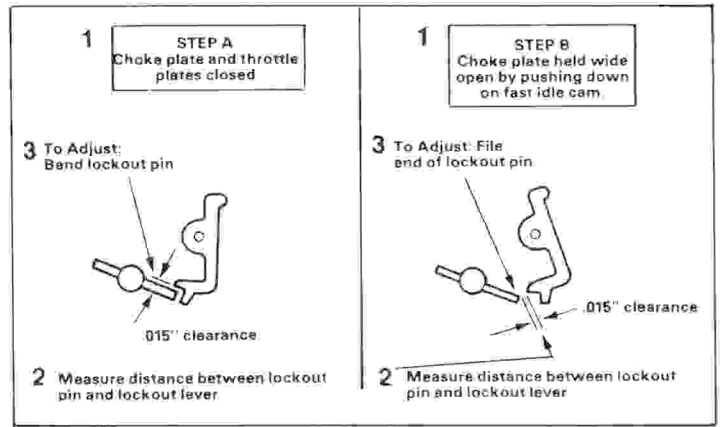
SECONDARY THROTTLE LOCKOUT ADJUSTMENT
